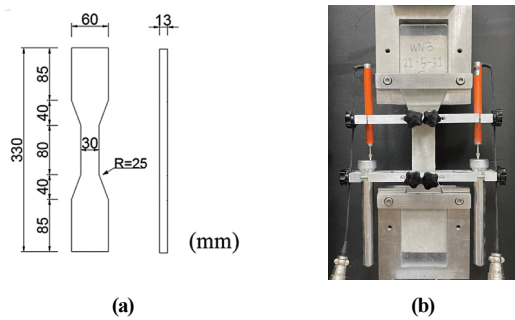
(a) Dimension of specimen for tension test, (b) test setup
